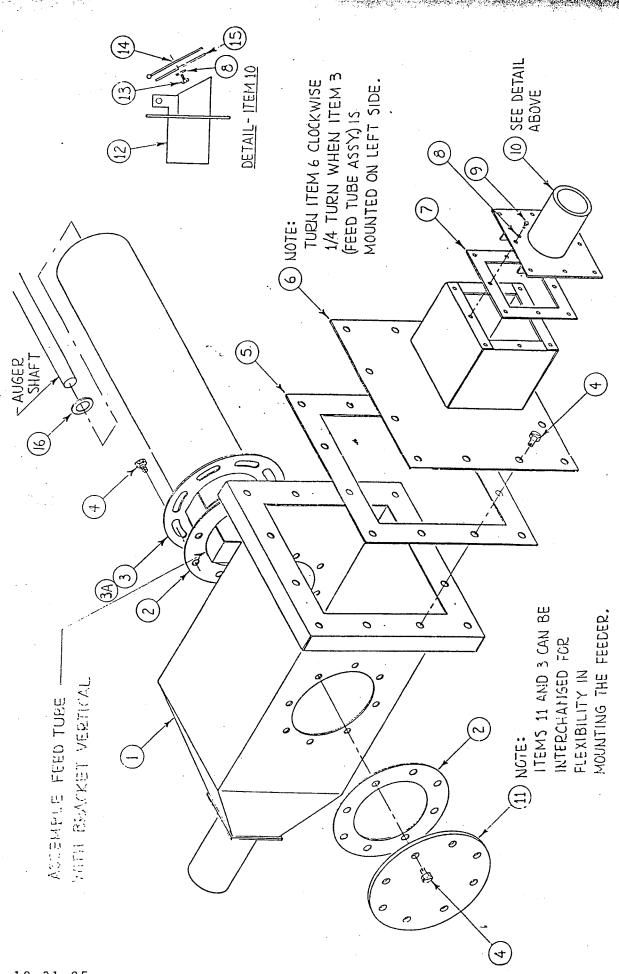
SCREW FEEDER REPLACEMENT PARTS
